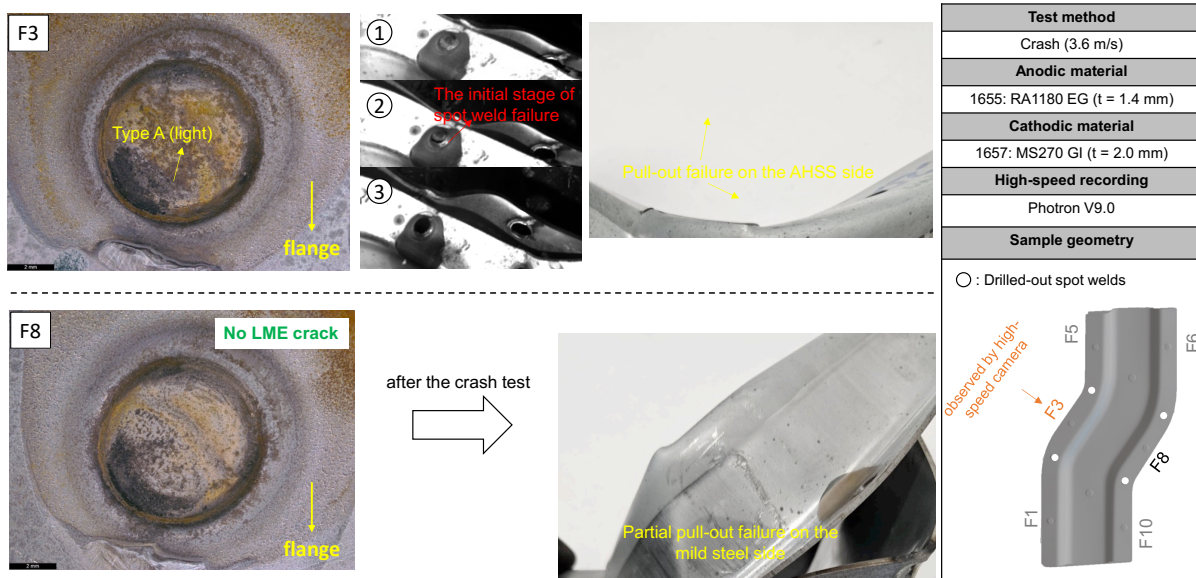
Spot weld failure in sample 41 (MTC6)
